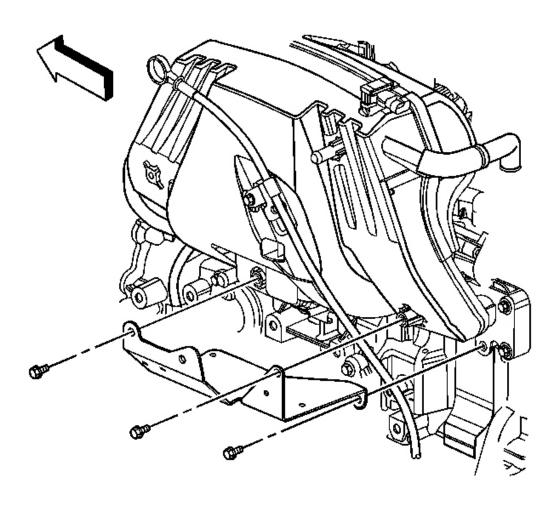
View Of Engine Wiring Harness Bracket Courtesy of GENERAL MOTORS CORP.
